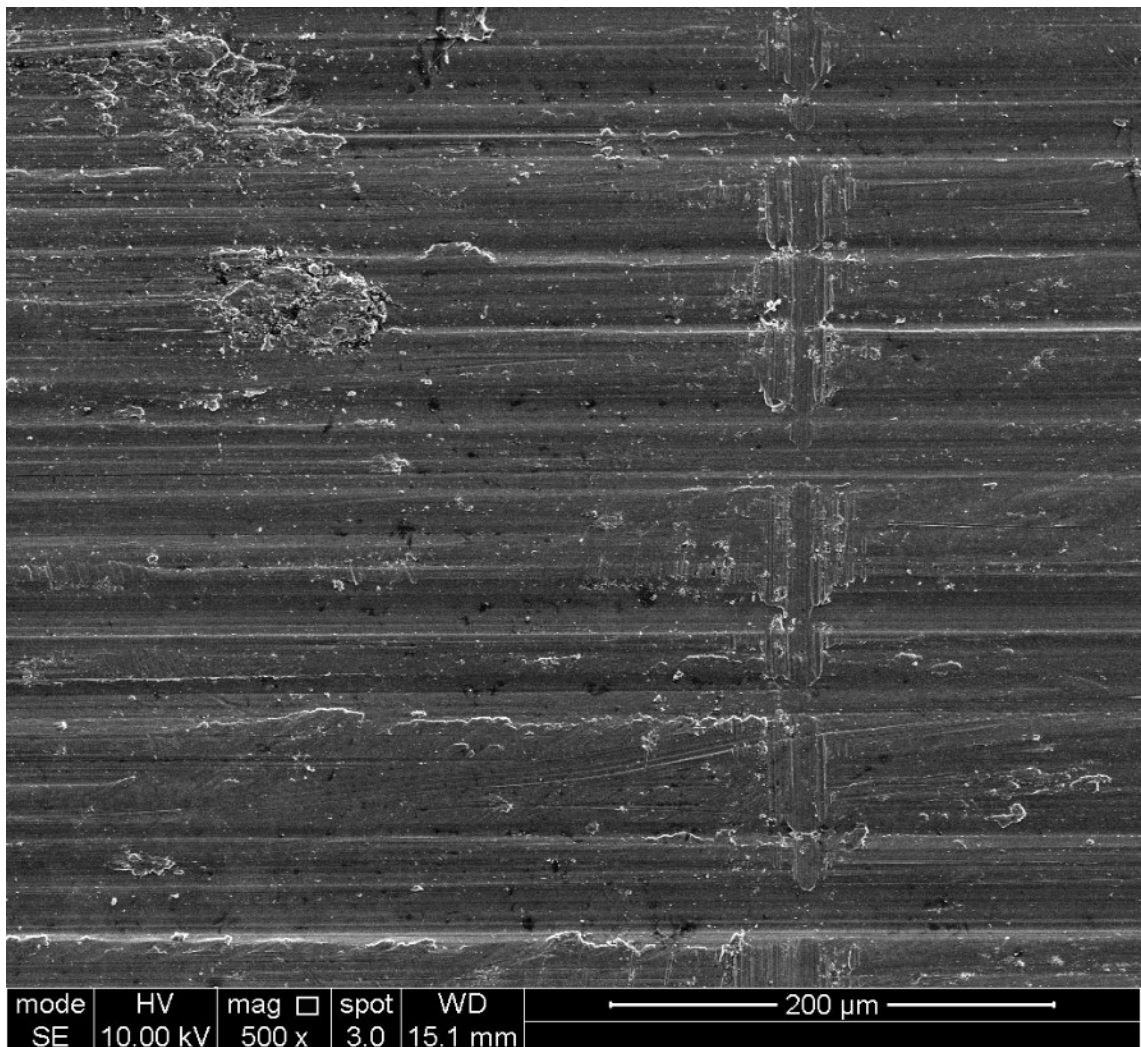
Specimen 8 - 10 mm plate; Tool retracting tool marks
